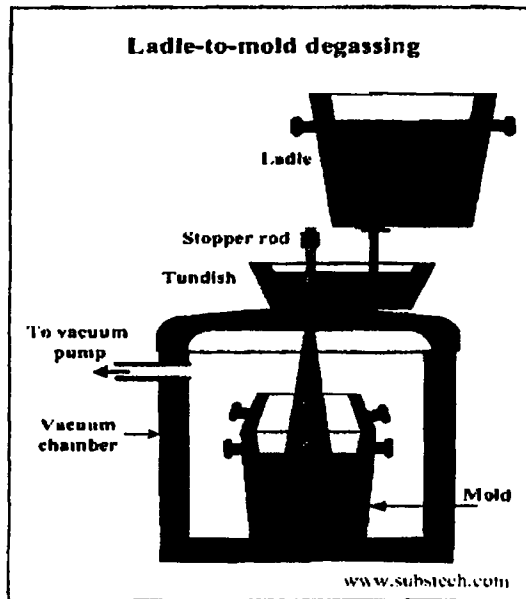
Schematic Arrangement of Ladle-to-Mold Degassing Process
